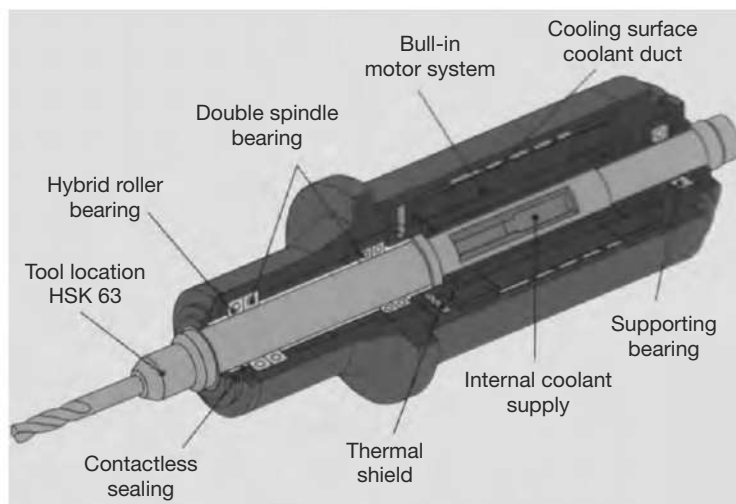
Spindle design with an integral Spindle Motor and Cooling System for a CNC Machining Centre (Courtesy, Hiller Hille GMBH, Germany)
